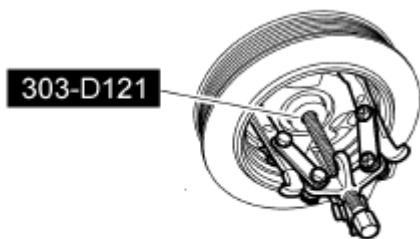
Identifying 3-Jaw Puller (303-D121) On Crankshaft Pulley
